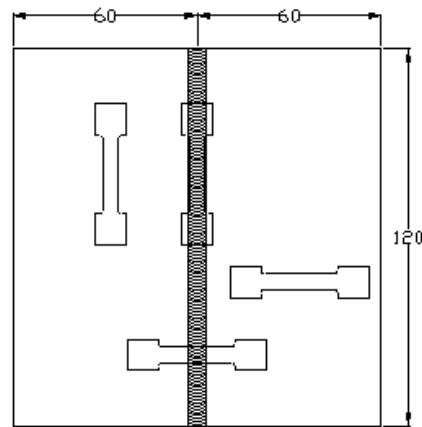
Sample Drawing and Specimens Extracted for Tensile Test
